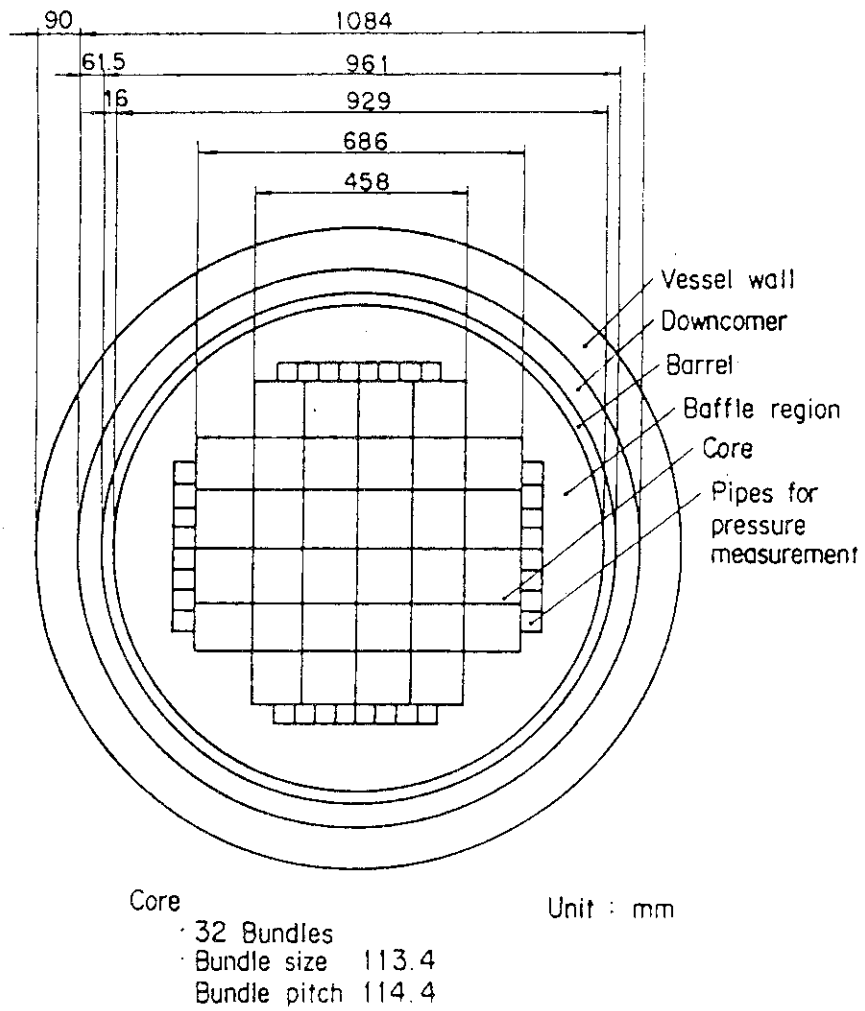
Dimension of CCTF Core-II pressure vessel cross section
